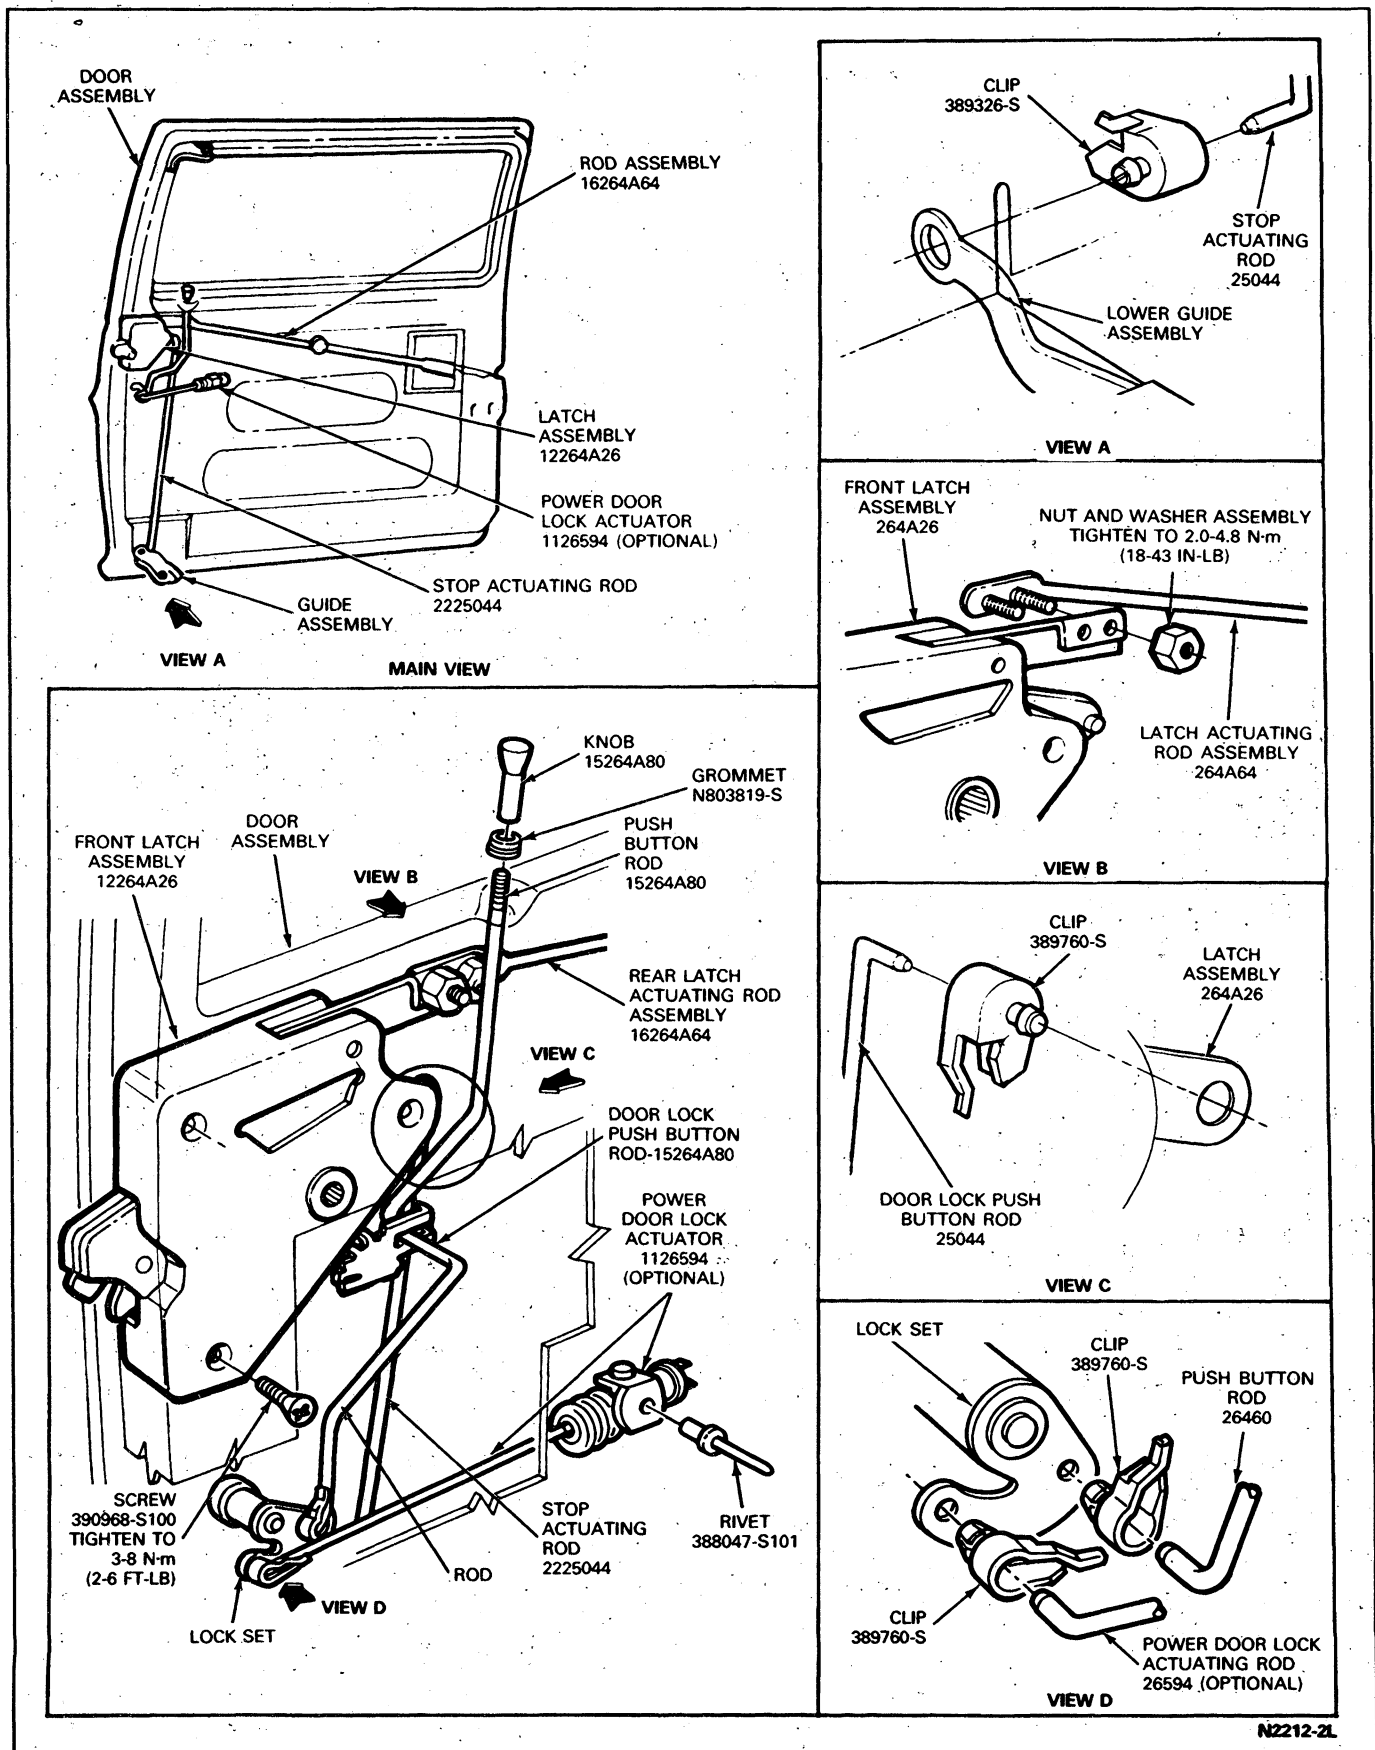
Sliding Door—Latch and Rods—E-150—E-350
